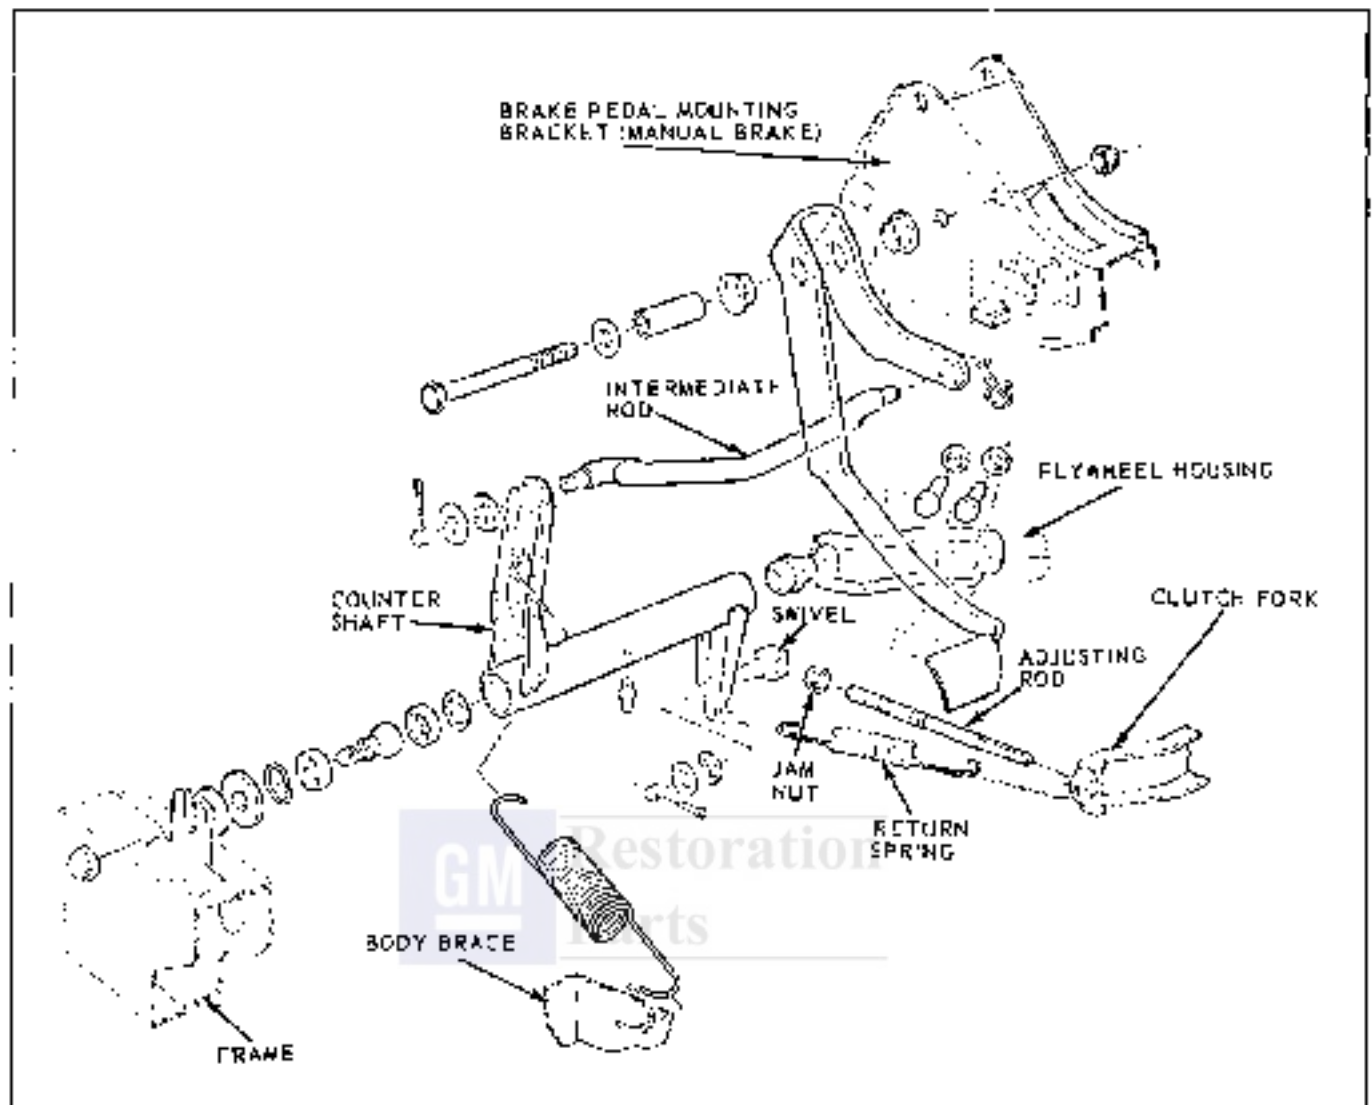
Pontiac Clutch Pedal Adjustment
